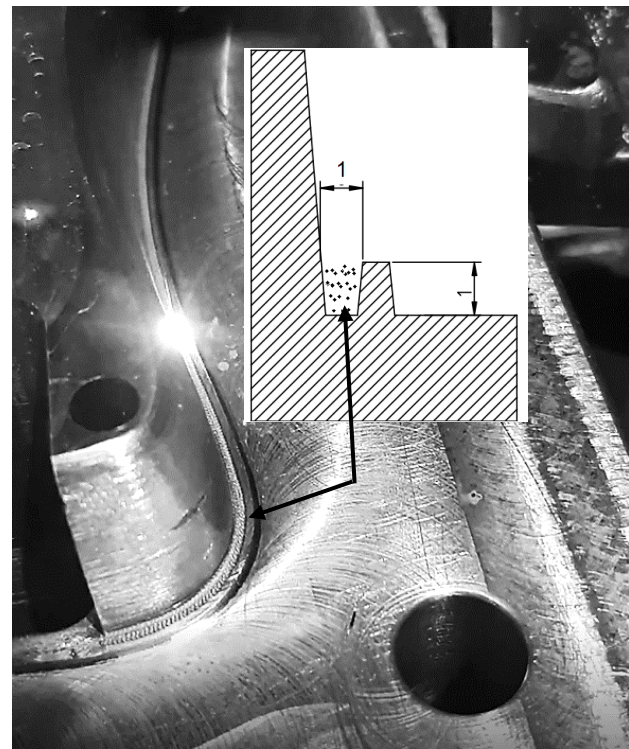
Detail of laser micromachining 2 ½ „pocket” strategy
